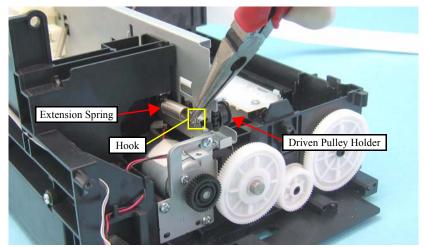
Removing the Extension Spring and Driven Pulley Holder
